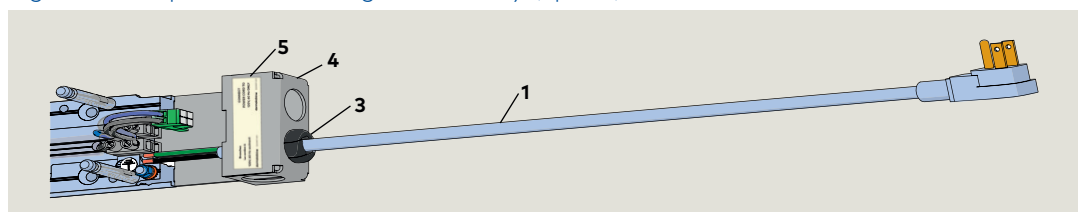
PC power cord wiring kit assembly (option)
